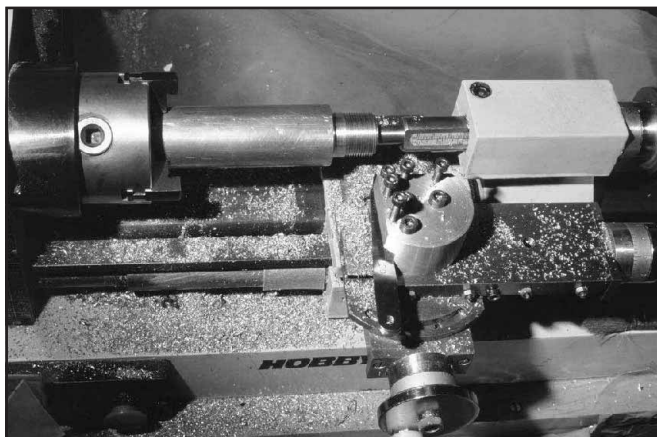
A piece of brass stock in the lathe, just after cutting the external thread of the insert that goes in the mounting base.
